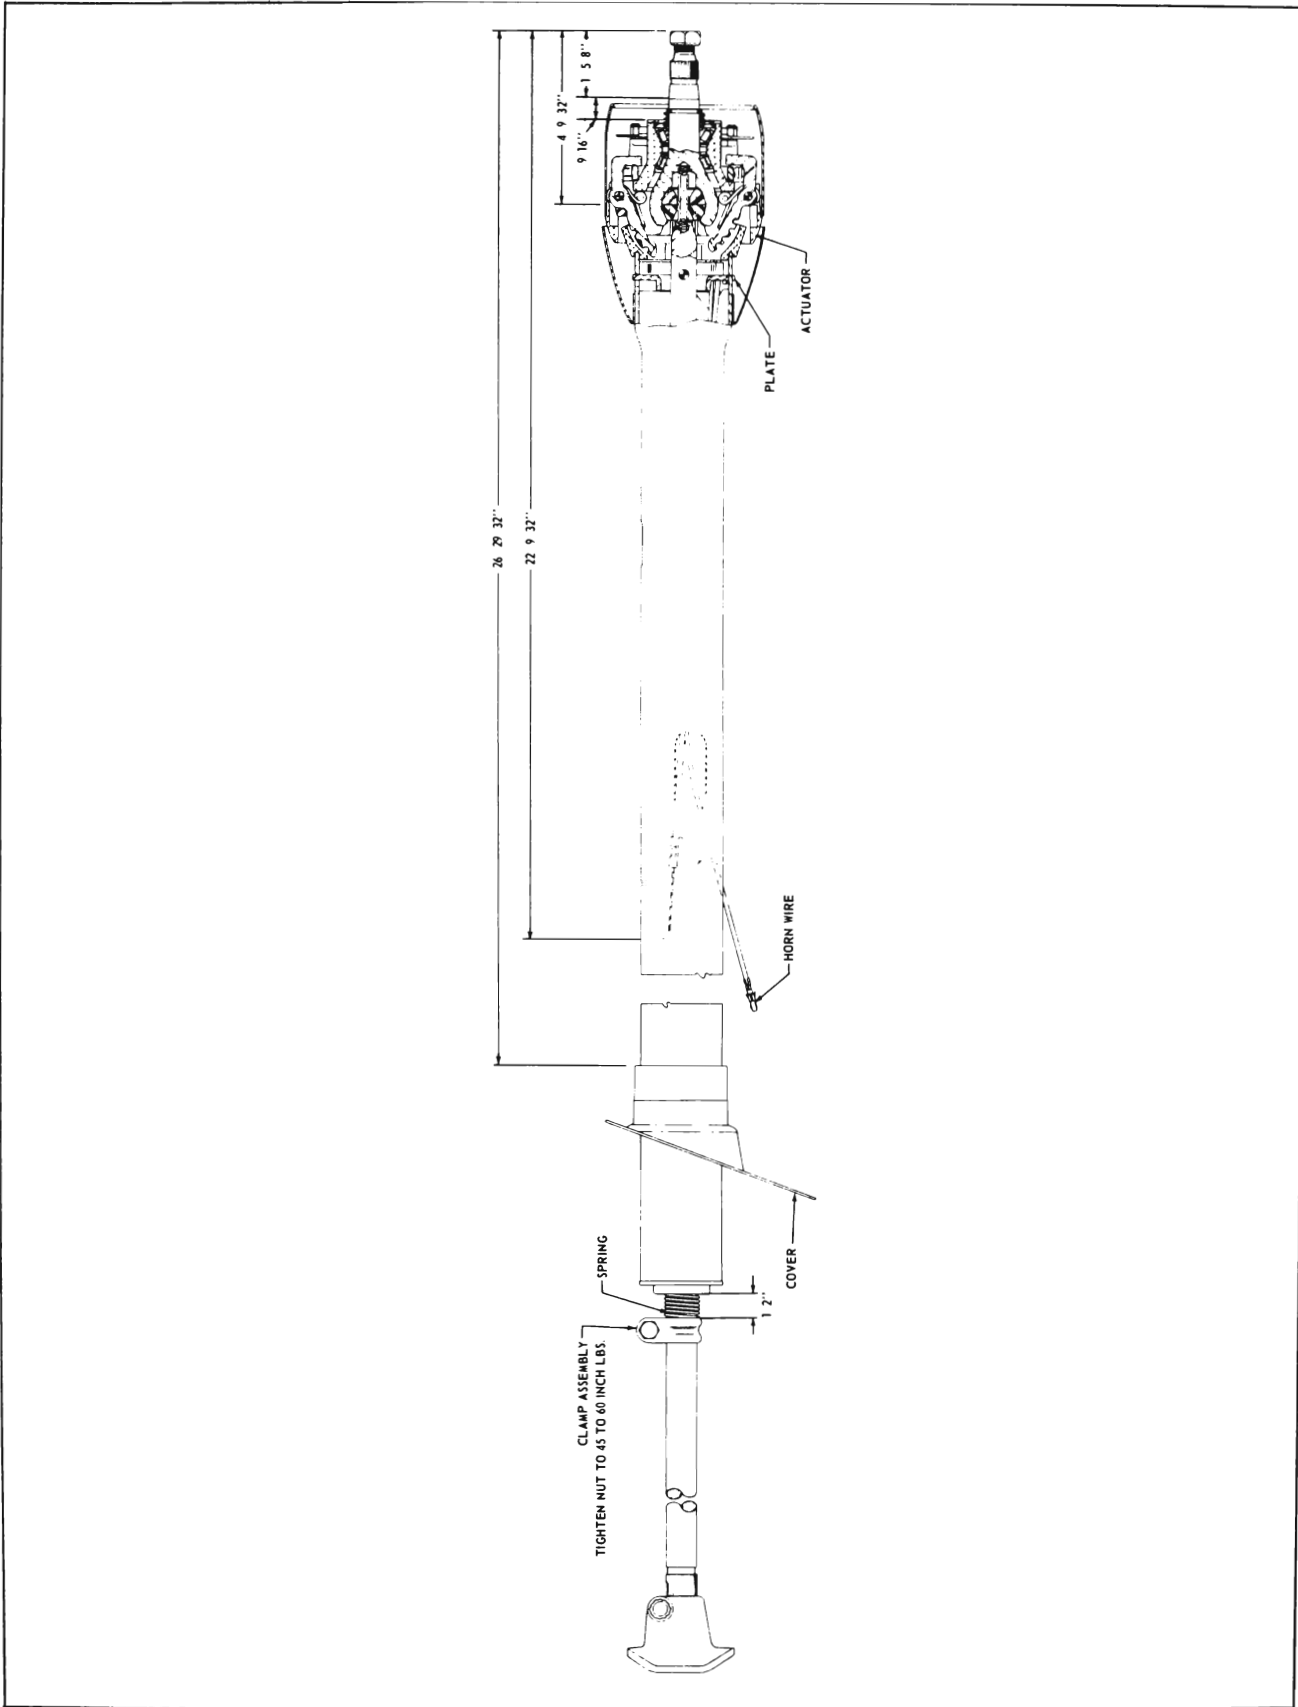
Tilt Wheel Mast Jacket and Transmission Control Shaft - Manual Shift
